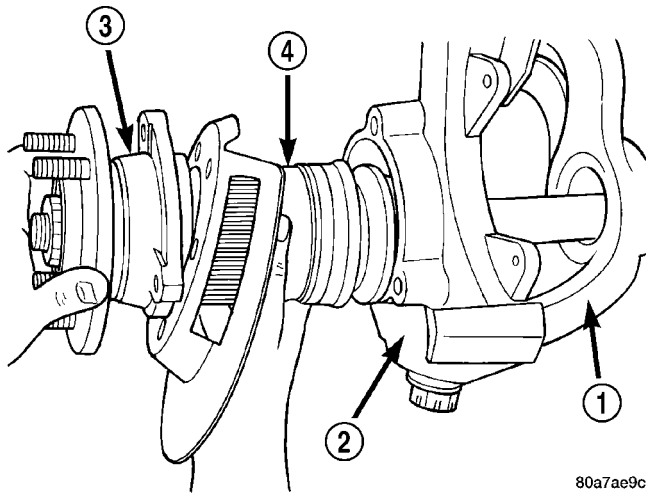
HUB BEARING AND AXLE ASSEMBLY
